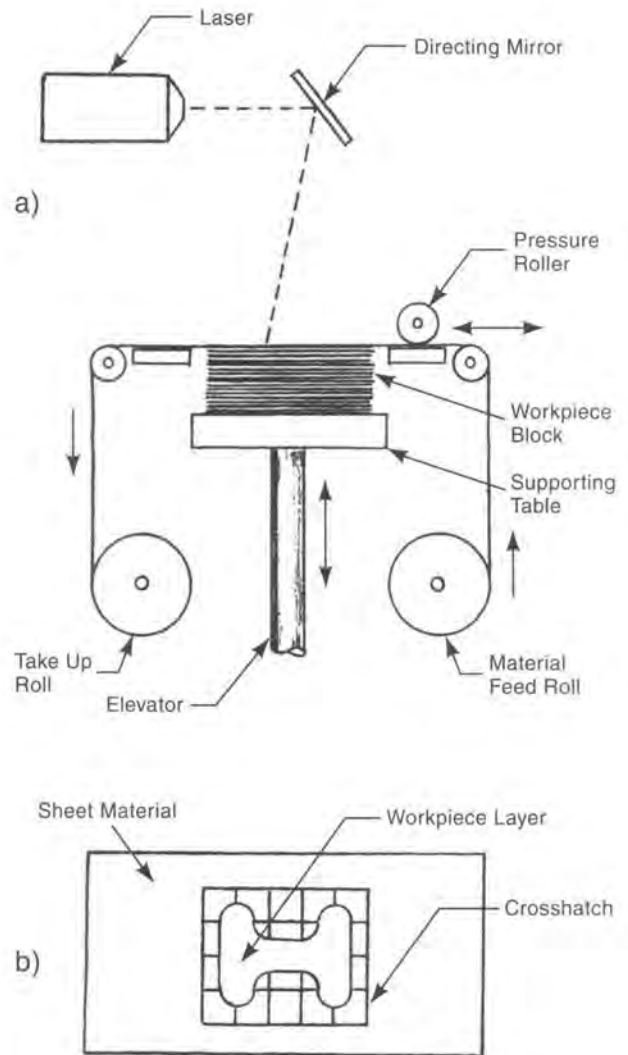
A5a Schematic illustration of Laminated Object Manufacturing (LOM). View a) shows the equipment in operation, where adhesive-coated sheet material is fed to the machine on which the outline of the workpiece is cut. A pressure roller presses each layer against the stack and the sheet material advances for the next layer. The elevator lowers the supporting table slightly as each layer is added. When the final layer is completed, a solid block of material containing the workpiece (prototype part) can be removed from the machine. View b) shows one layer with the outline of the workpiece cut in the sheet by a laser, and cross-hatching around the workpiece. The cross-hatching makes it easier to remove the supporting material that surrounds the finished prototype.
